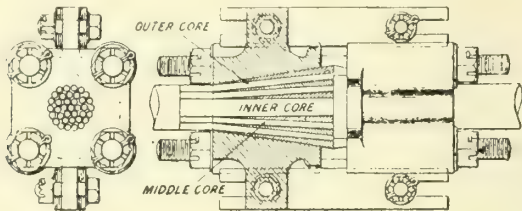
MECHANICAL CORE-TYPE JOINT FOR 1 1/4 SQ. IN. CABLE.
